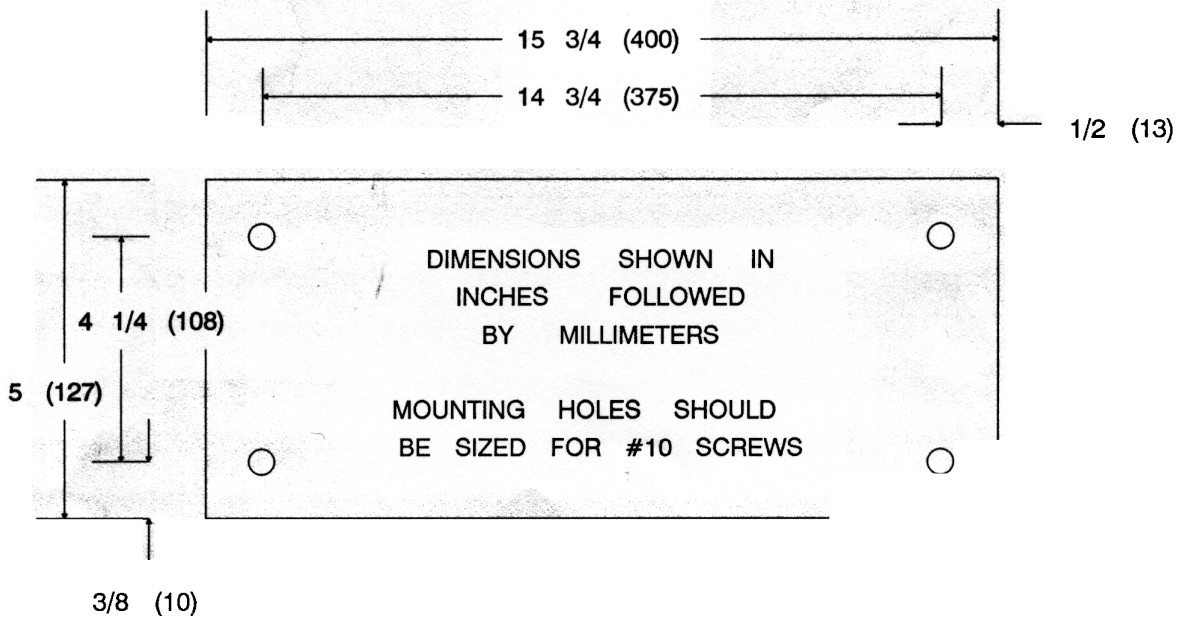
PLS-850 Assembly, Mounting Requirements
